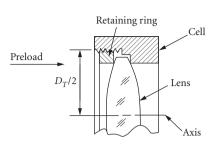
A lens preloaded in its cell with a threaded retaining ring.
